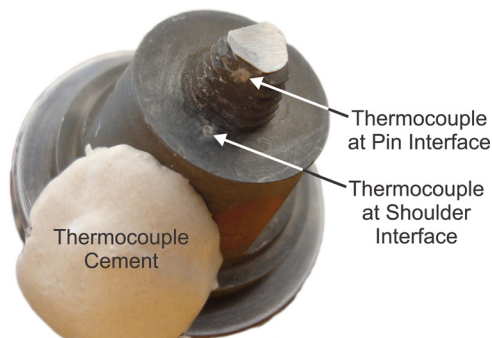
Close-up view of FSW tool showing the exposed thermocouples at the shoulder-workpiece and pin-workpiece interfaces
